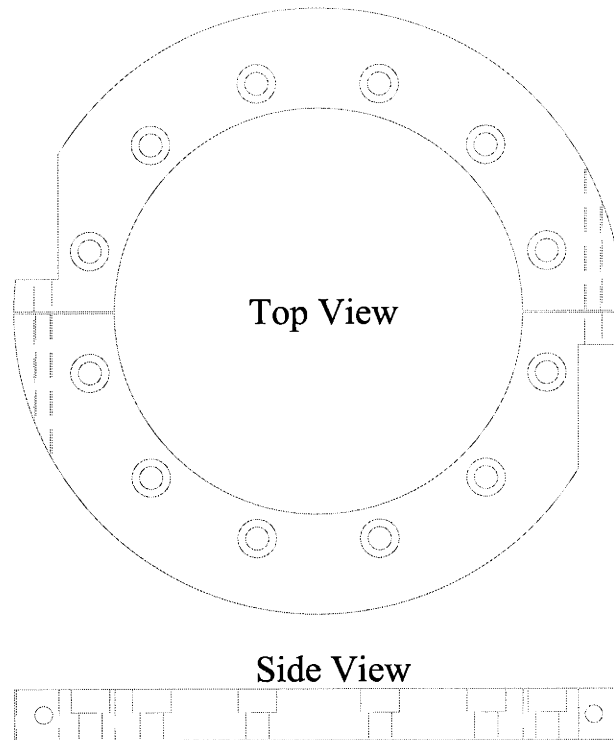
Split clamp ring used to form the indium seal between the tailpiece and detection chamber. This design serves as a removable flange.
